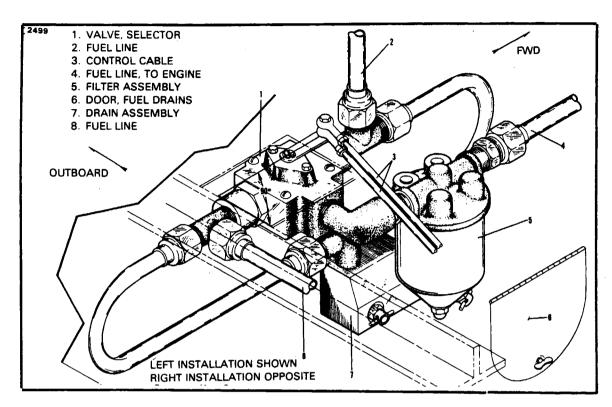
Fuel Selector Valve Installation PA-23-235 and PA-23-250 (six place) (Dukes P/N 3654-00-1, -2)
